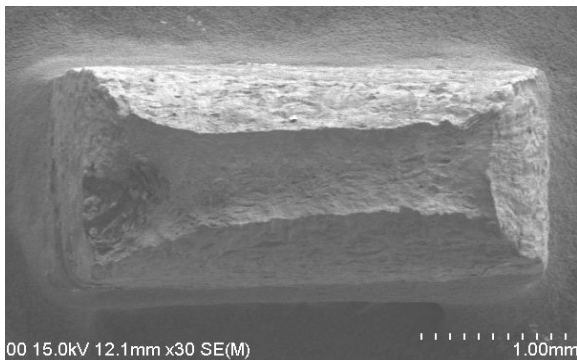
Typical fracture surface (A fracture surface of the specimen after finishing the measurement in the No. 9 solution in Table 3)
